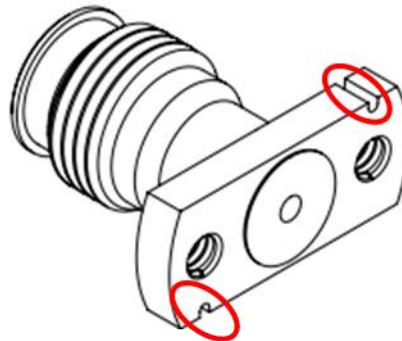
Notches milled in the foot of Samtec's compression mount connector to aid in connector assembly.
